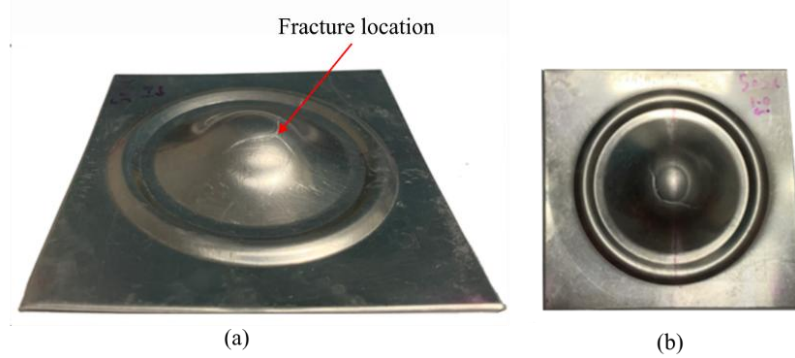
LDH tested specimen showing a) isometric view and b) top view
